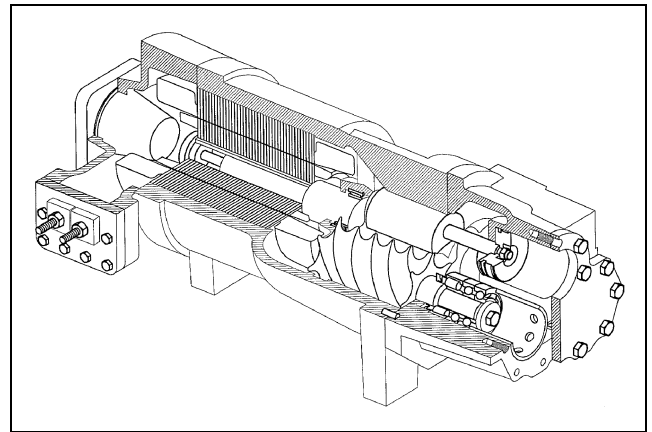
Semihermetic Twin-Screw Compressor with Suction Gas-Cooled Motor
